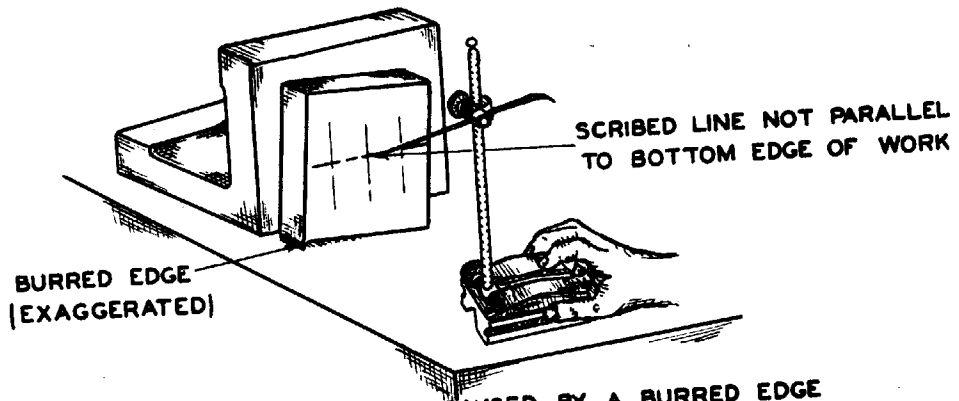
INACCURATE LAYOUT CAUSED BY A BURRED EDGE
